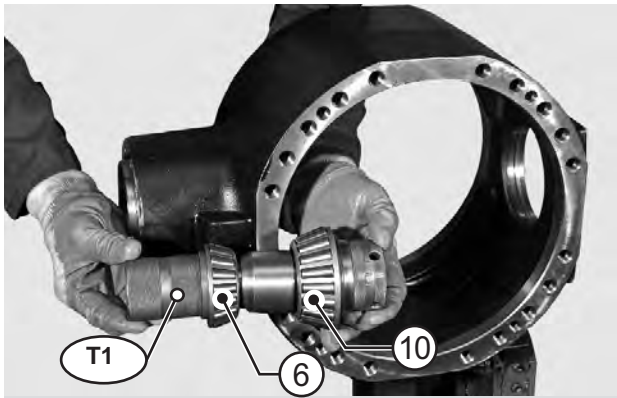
CALCULATING PINION BEARINGS ROLLING TORQUE
